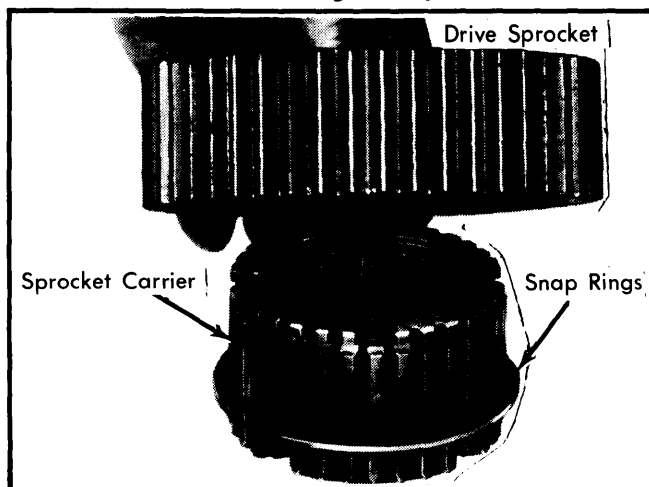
Installing Drive Sprocket on Sprocket Carrier
